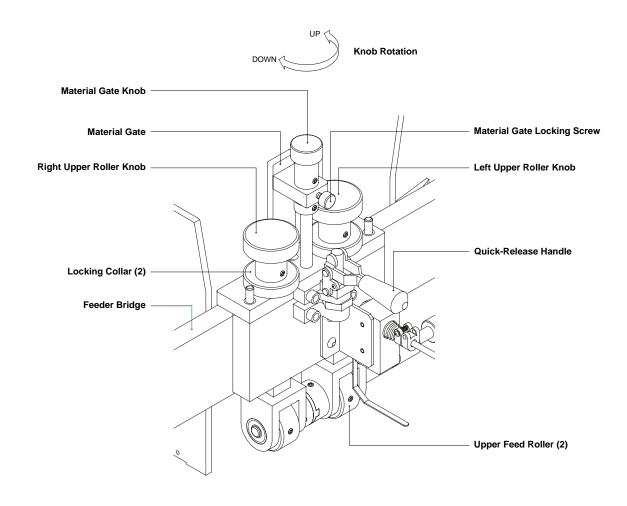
Feeder material gate and upper feed roller details indicating adjustment points located on the feeder bridge assembly.
